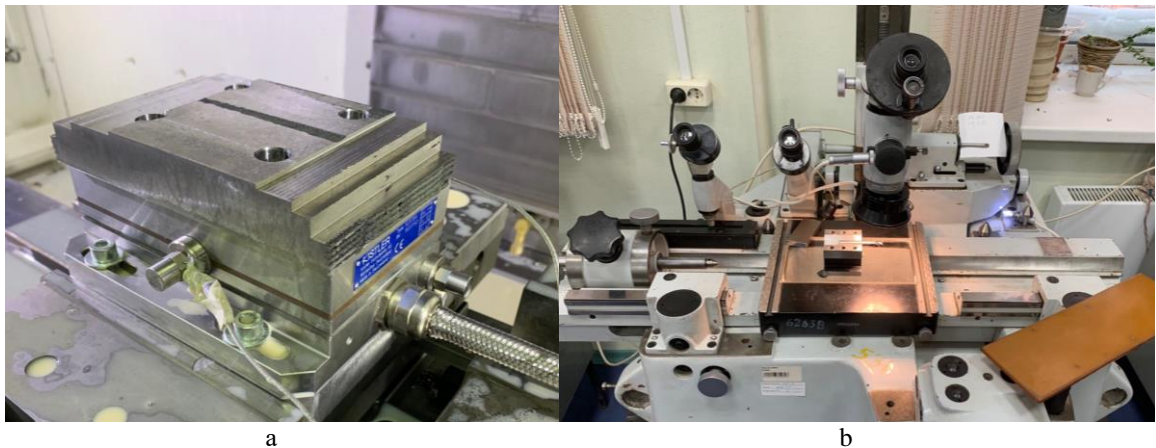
Workpiece on the dynamometer (a); Universal Measuring Microscope 21 (b)
